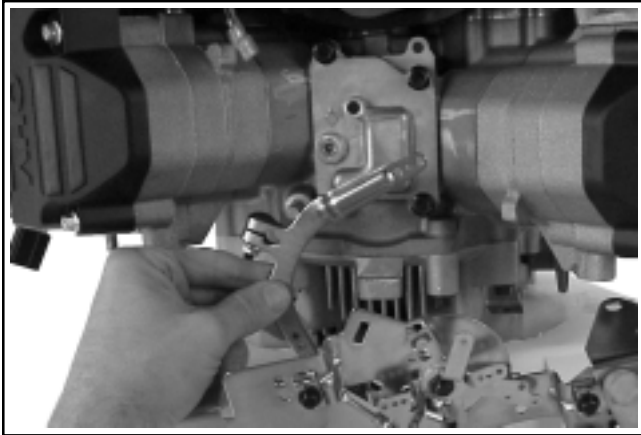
Removing the Four Screws from Main Throttle Bracket.
